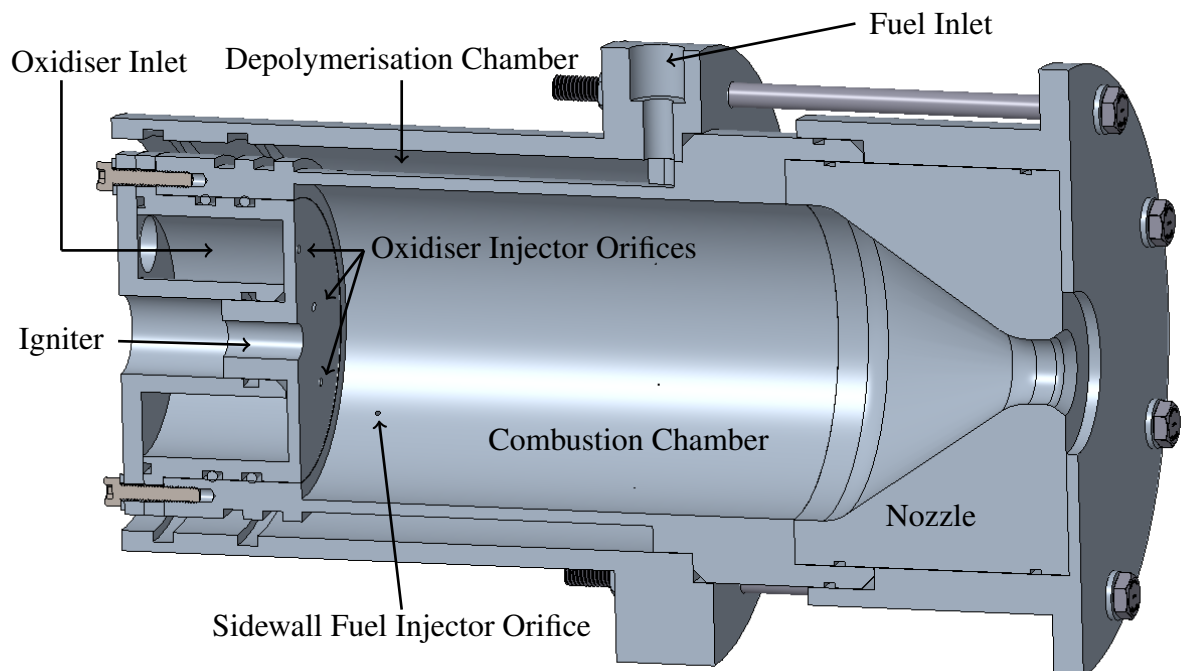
Ouroboros-1 engine assembly cross-section view.
